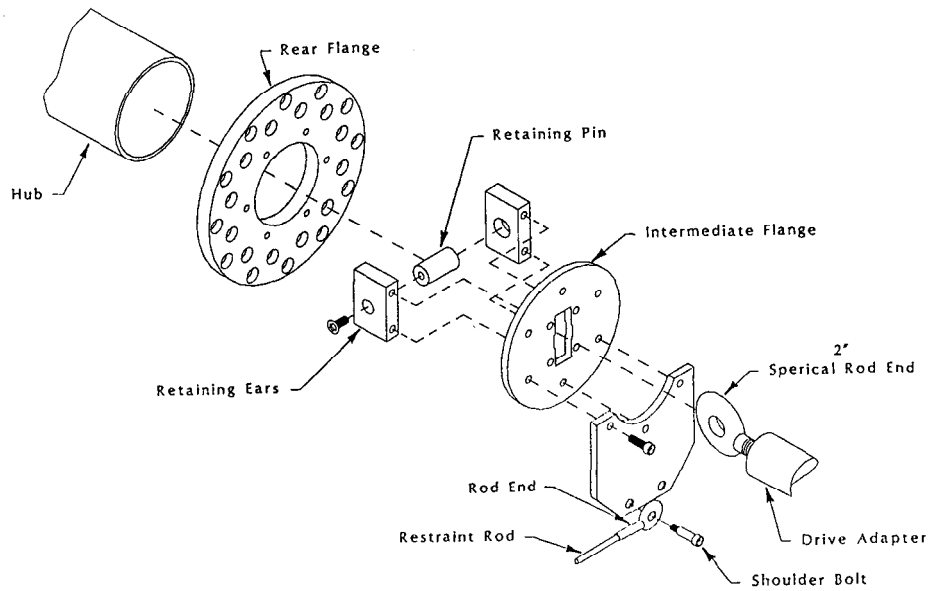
Exploded View Showing Components of the Rear Central Hub Drive Attachment.
